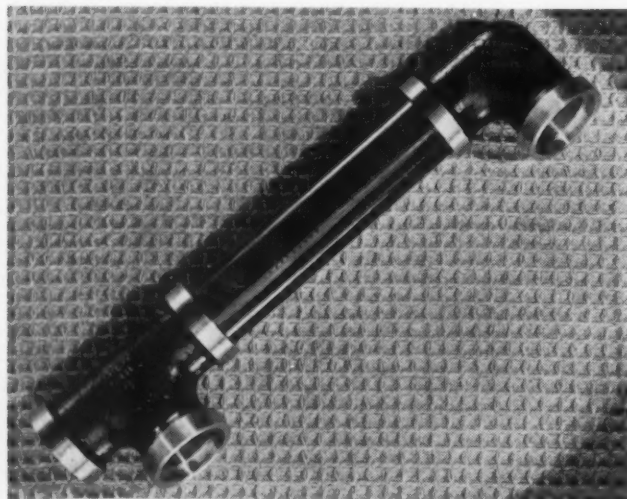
SOCKET-TEE AND -ELBOW ASSEMBLY
